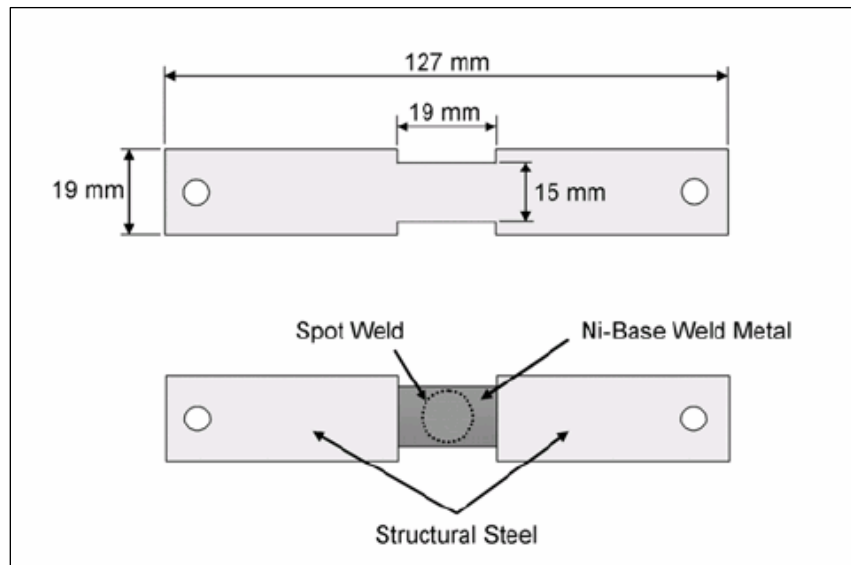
Strain-to-fracture (STF) test sample (Lippold et al. 2004).
